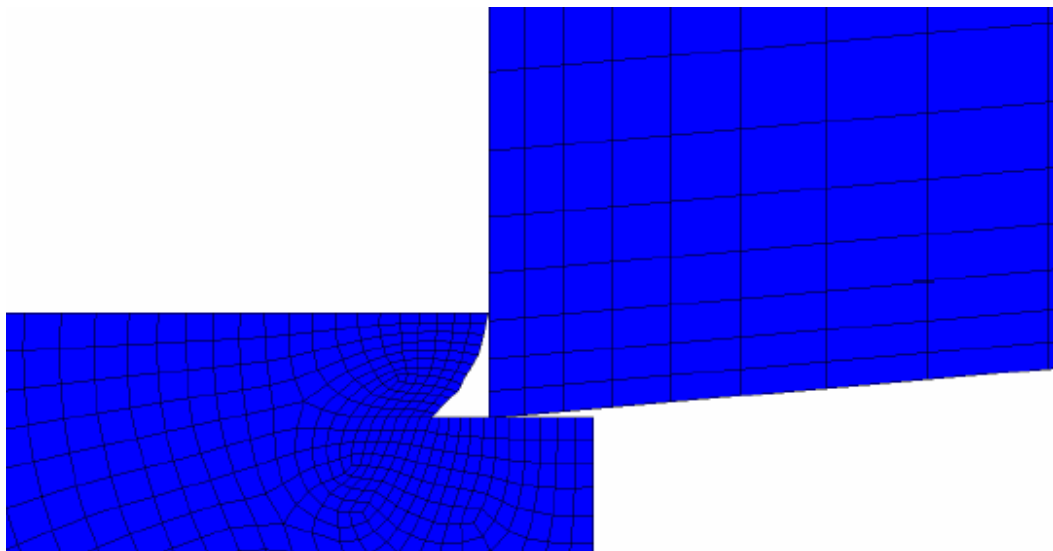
Region of workpiece showing modified initial shape for sharp tool.
